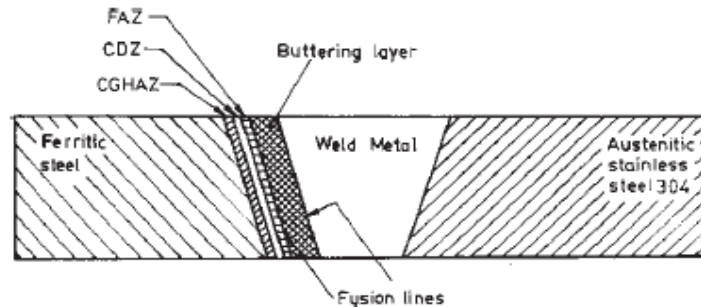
Bimetallic austenite-ferrite weld configuration with a buttering layer and different zones [2]
